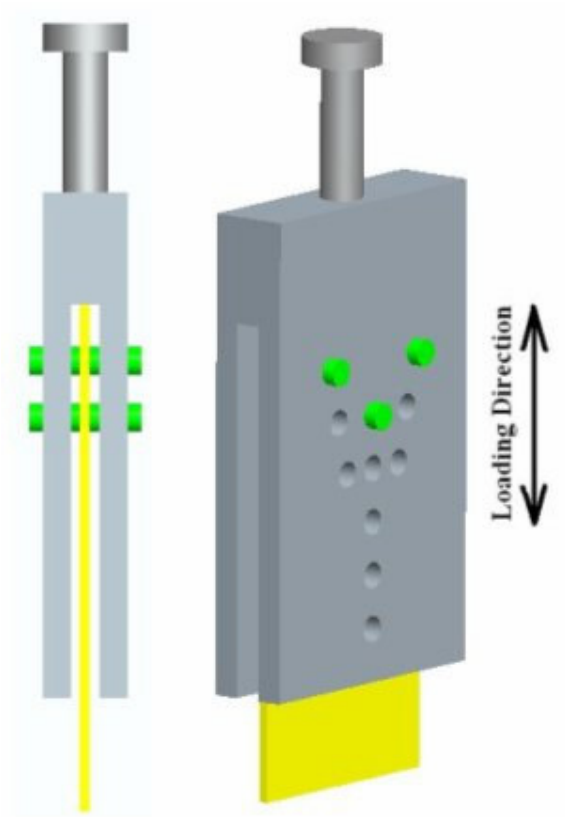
Tensile test setup – test fixture (grey), test specimen (yellow), and rigid pins (green)
